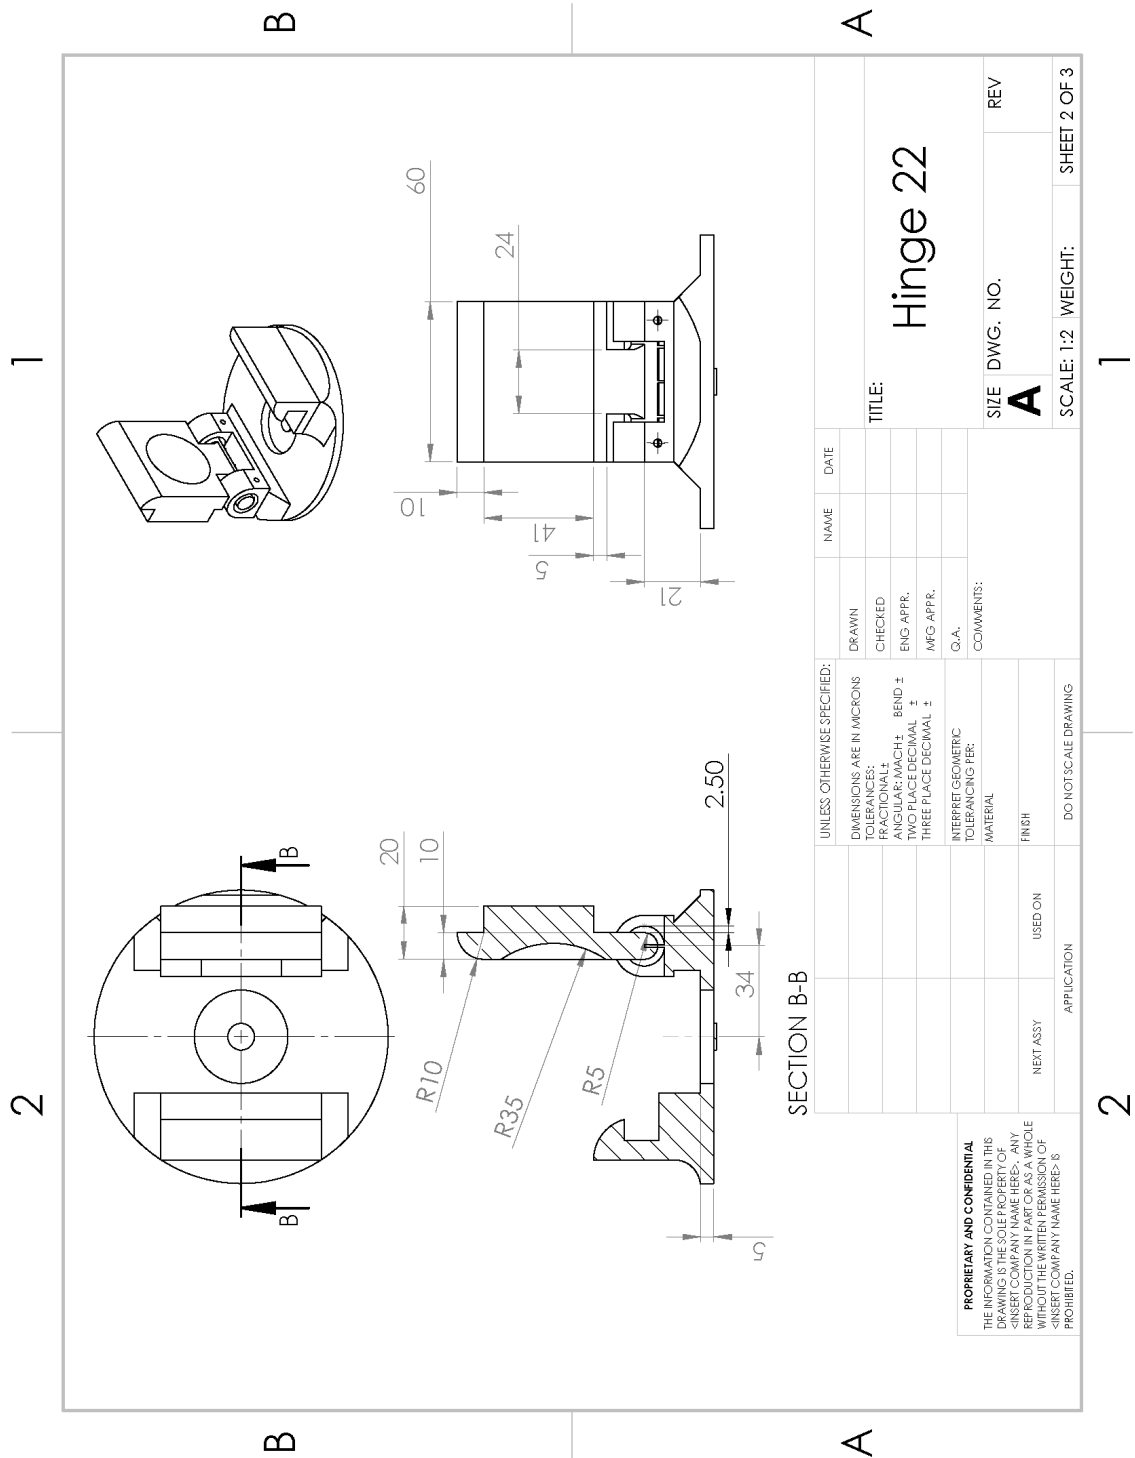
Technical drawing of the hinged FP cavity RI sensor, page 2.
